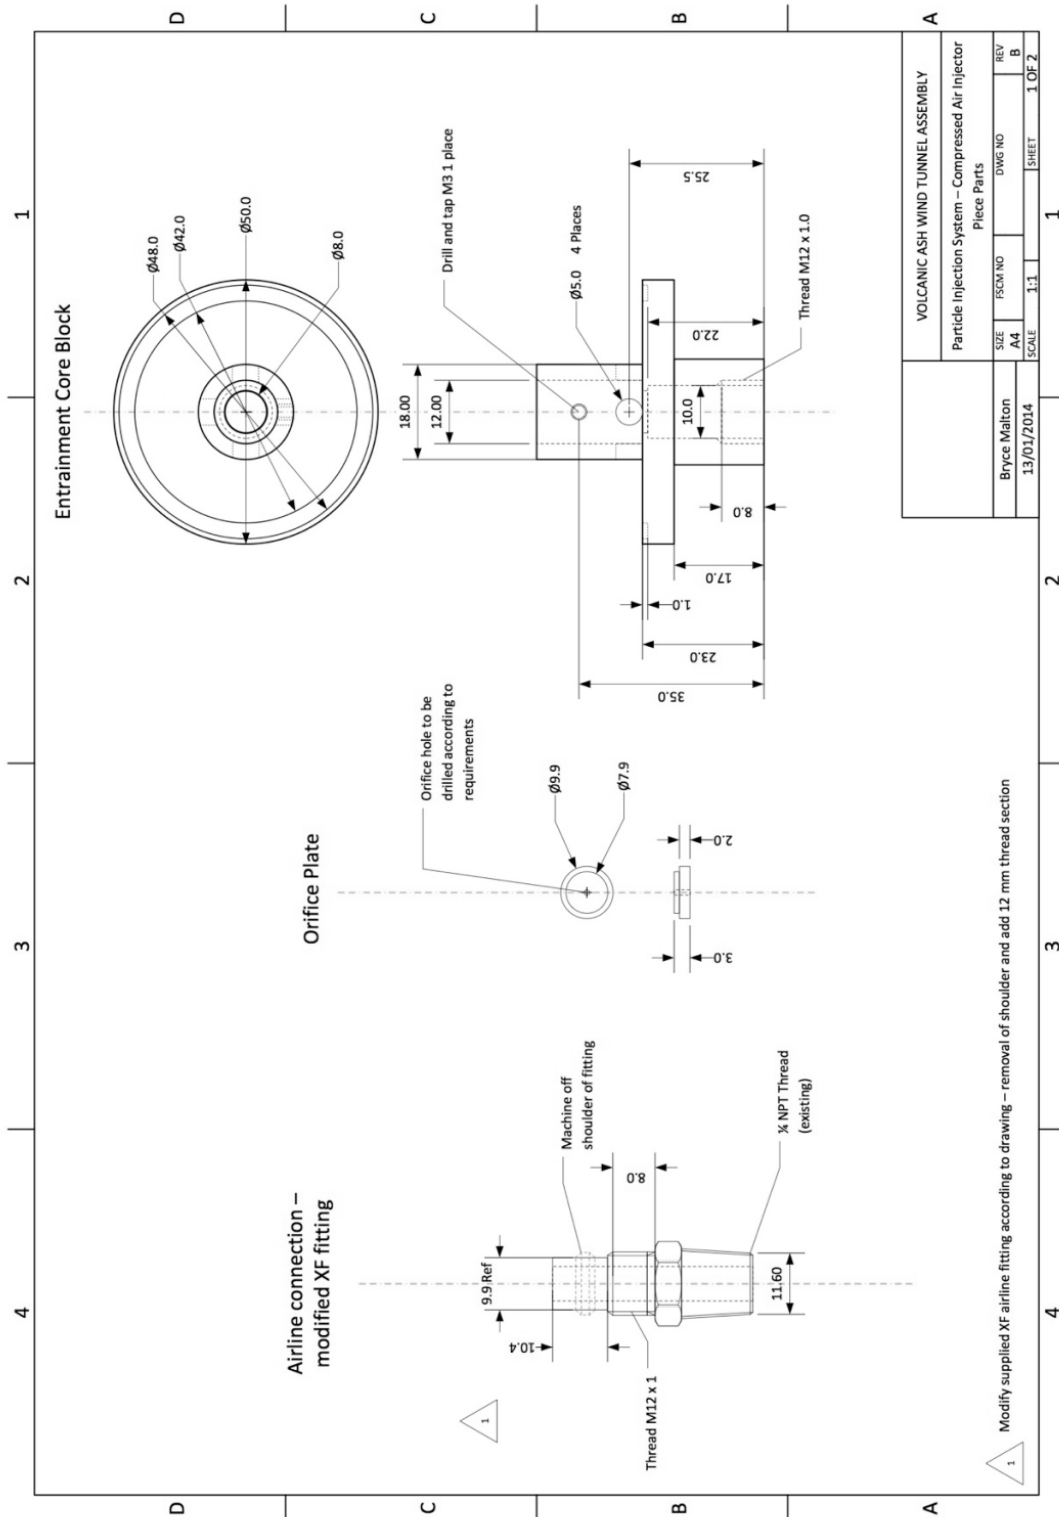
Revision 1 high-pressure air nozzle piece parts.
